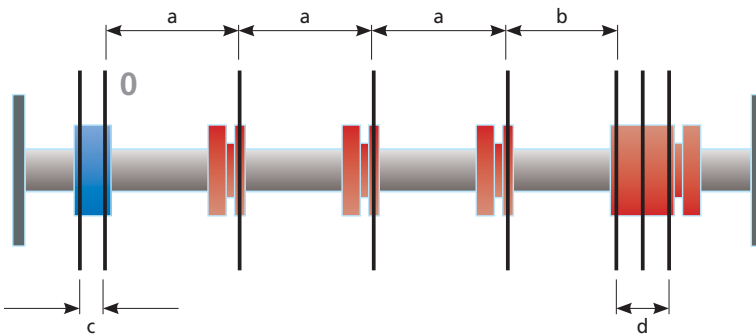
Movable saw configuration with one fixed and four movable saw bushes
